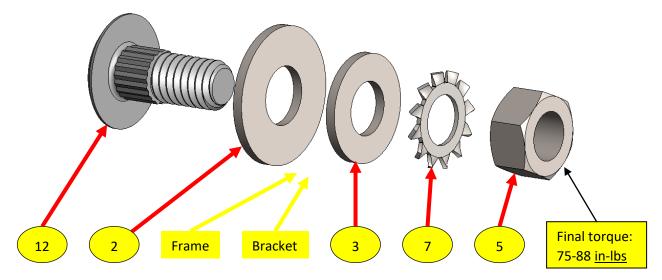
Knurled Carriage Bolt "Stack-up" (Common throughout)
